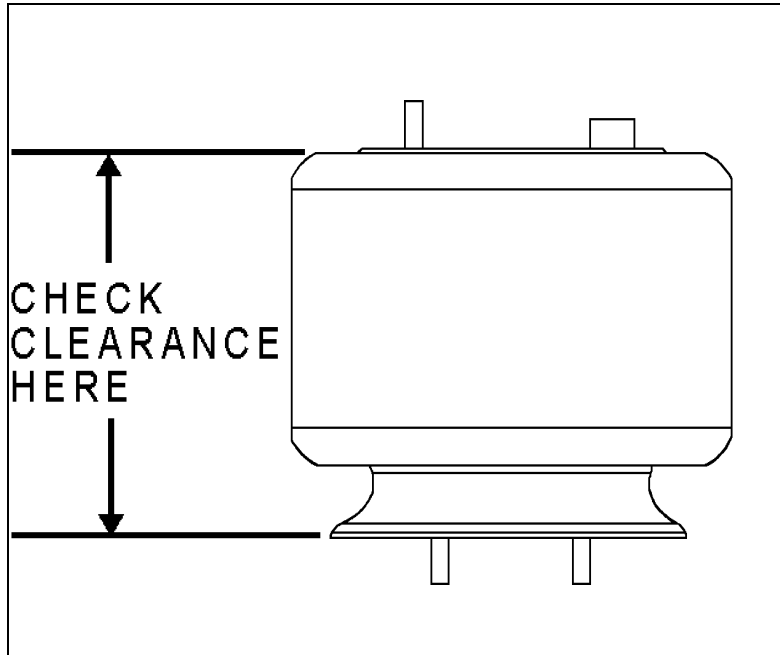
CHECKING THE CLEARANCE OF THE AIR SPRINGS
